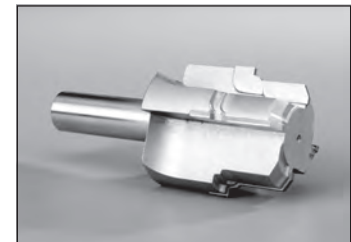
ISO 6149-1 Straight Thread Port Counterboring Tool with ID Groove
